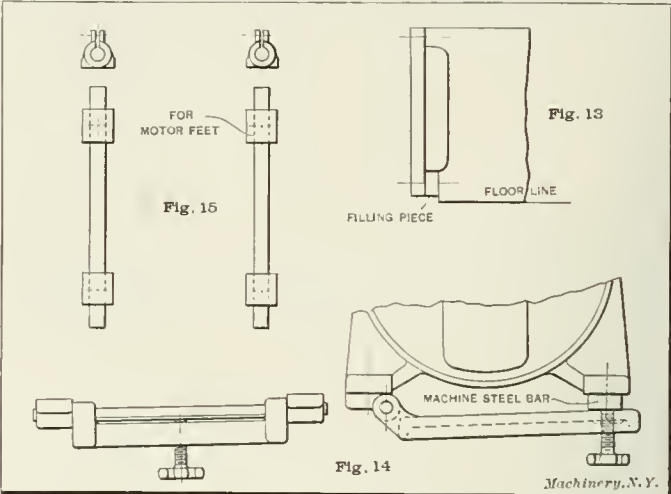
Method of Bolting Motor to a Machine Tool. Fig. 14. Swinging Bracket for Use where there is Room for Handwheel. Fig. 15. Pipe Motor Support
